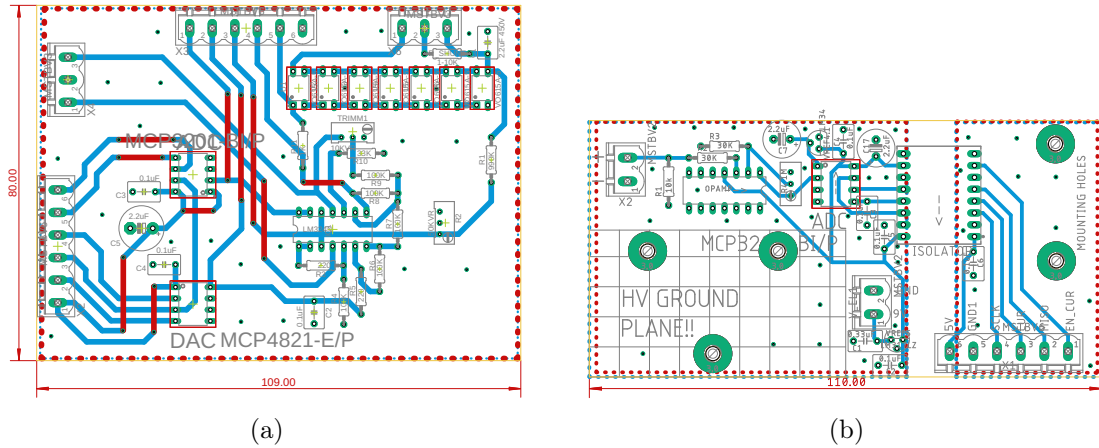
PCB designs for the *voltage control* (a) and *current read* (b) boards, realized with a 2-layer structure. The reported dimensions are expressed in mm.
